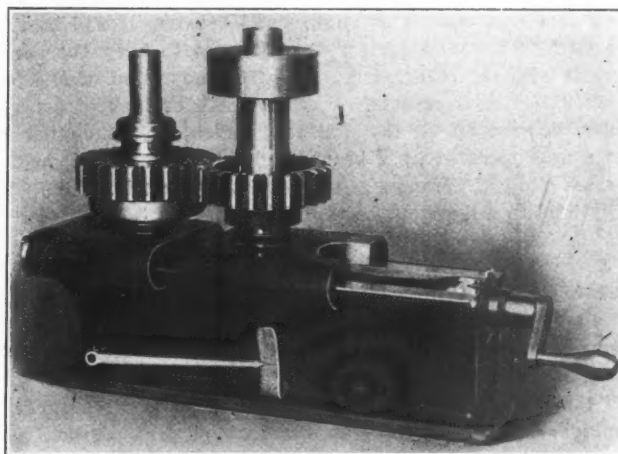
Fixture for testing Pitch Diameter and Concentricity of Spur Gears
